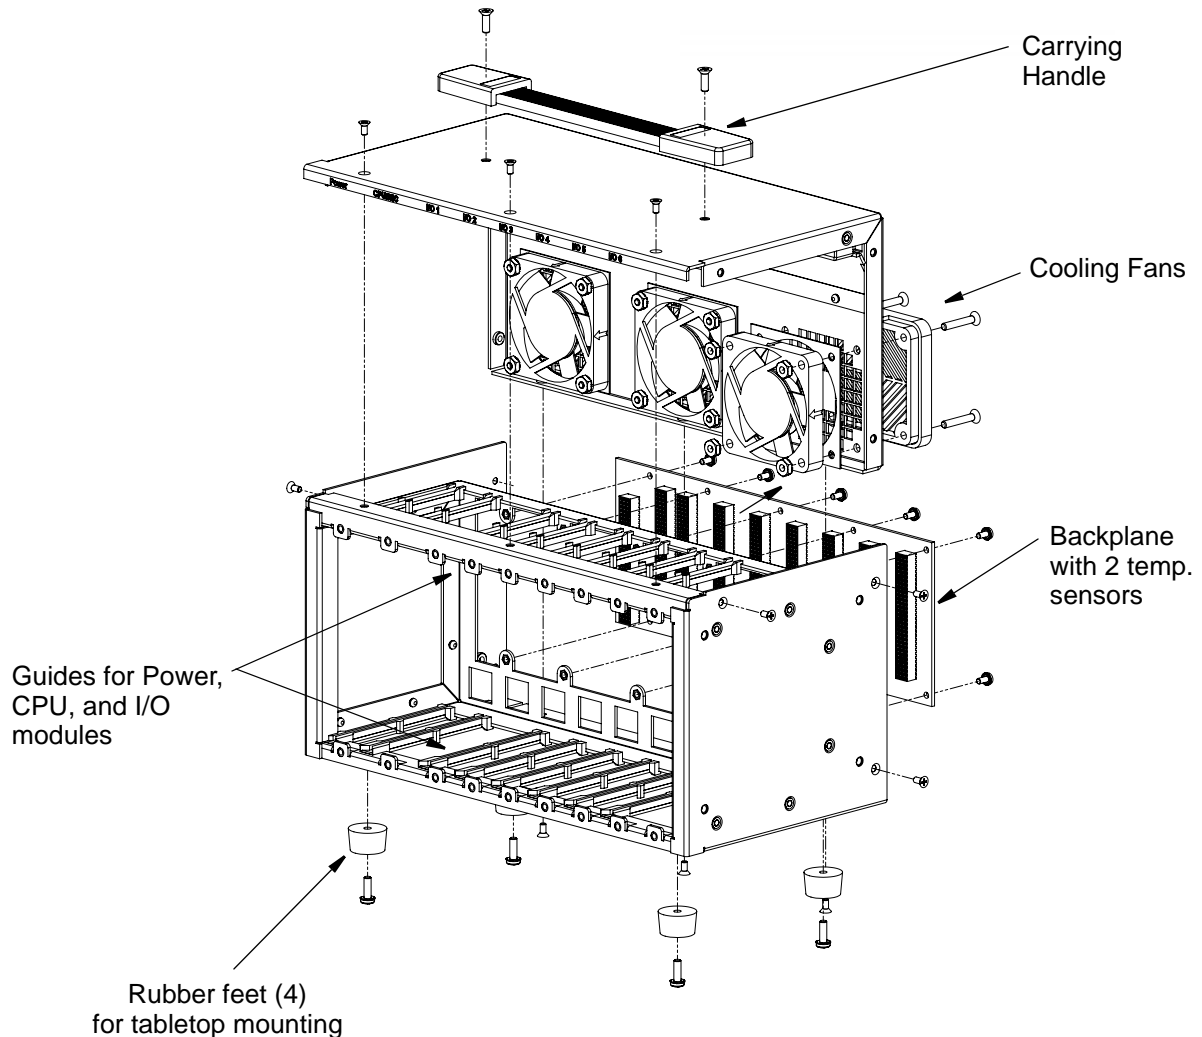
Typical HalfRACK DNR-6 Enclosure (Exploded View)
